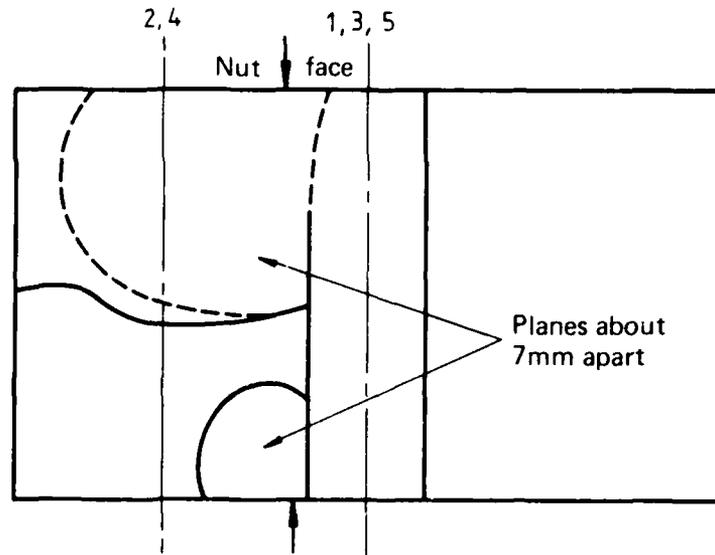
(c) FRACTURE SURFACES: SPECIMEN TYPE (D)
